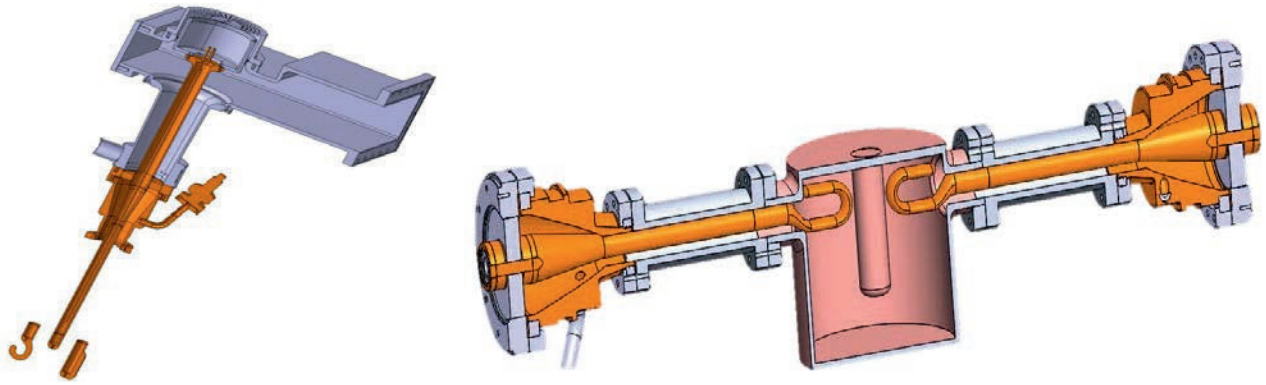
(left) Input coupler assembly; (right) test box for RF conditioning.
